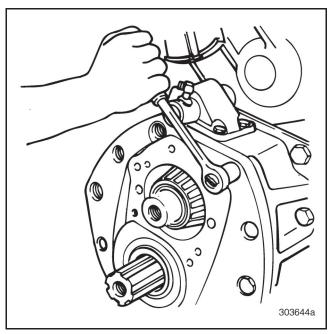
Removing Front-Drive Housing Cover Plate Capscrews and Dowel Bolts
